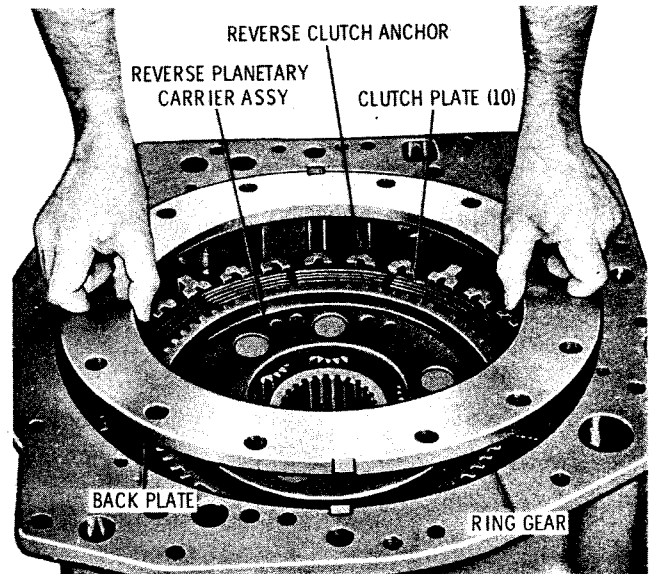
Removing forward-and-reverse clutch back plate (5630 models)
